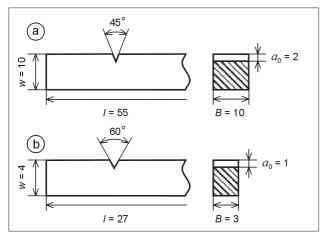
Geometry and dimensions of testing specimen for Charpy notch toughness test a) standard size (FS), b) sub-size sample (SS) (dimensions in mm).
